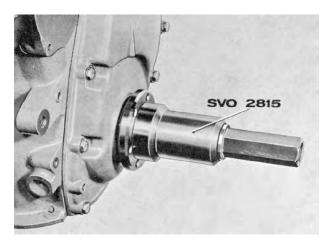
Fitting the polygon hub (6-cyl. engine)
